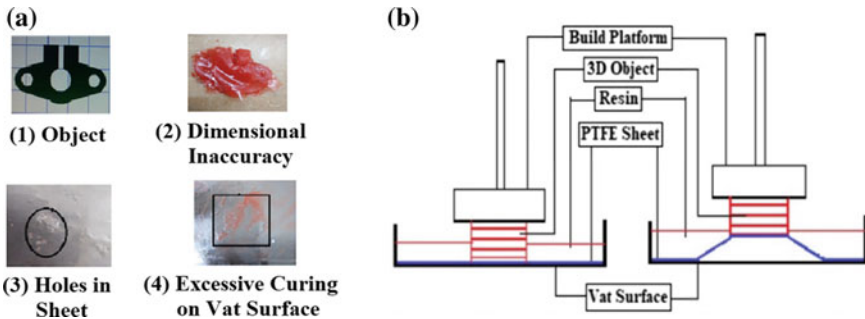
a Experimental results: (1) 3D object, (2) Dimensional inaccuracy, (3) Film failure, (4) Unnecessary curing between film and the vat surface; b Deformation of sheet
